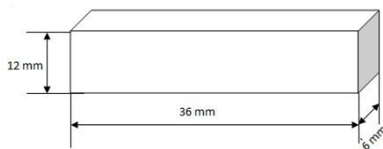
Short beam test specimen configuration (dimensions in mm)
